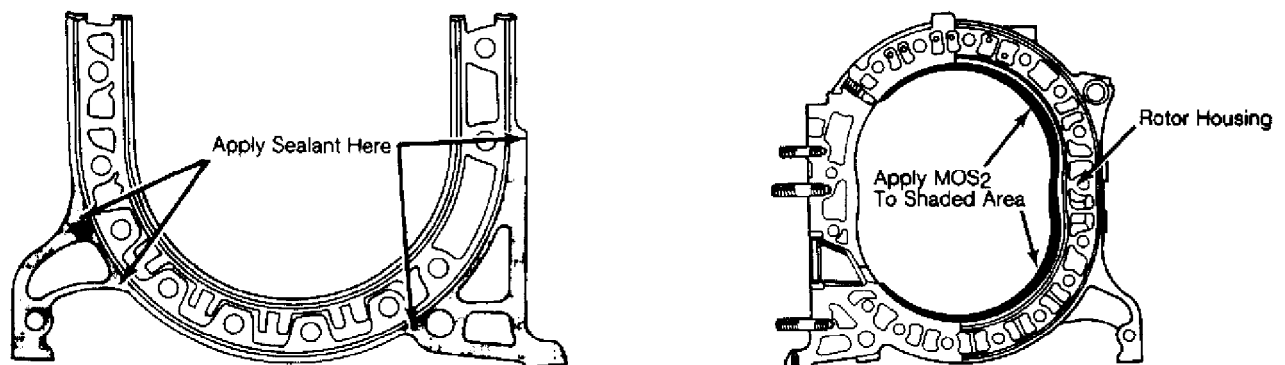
Applying Sealing Agent & MOS2 to Rotor Housing
